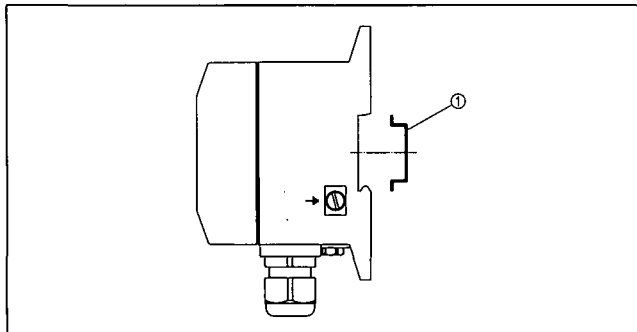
VEGADIS 11 and VEGADIS 12 carrier rail mounting
